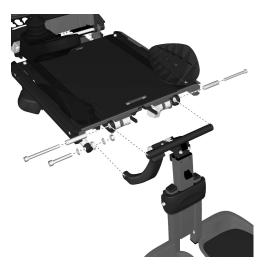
The leg rest is held in place by two screws and spacers. The front bracket of the actuator is held in place by a screw and lock nut.
